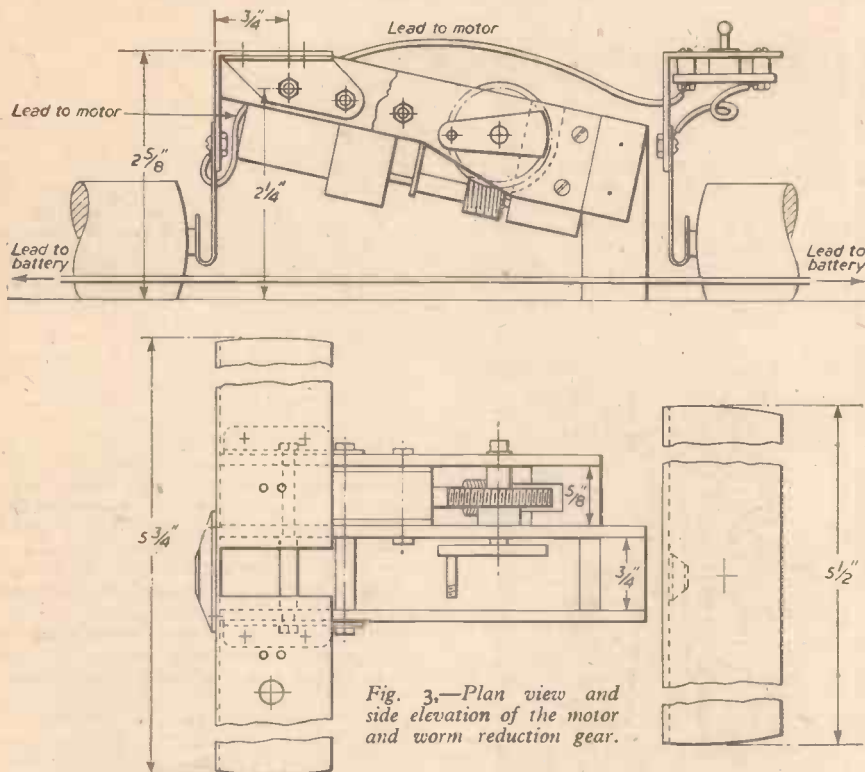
Plan view and side elevation of the motor and worm reduction gear.
